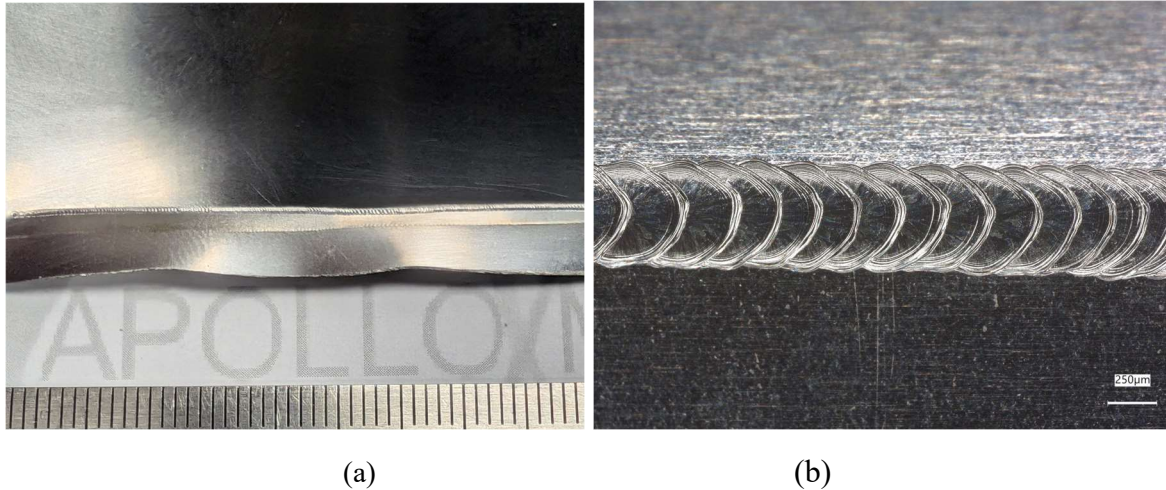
Autogenous weld produced using pulsed HLBW to join 0.13 mm (0.005") thick sheets of 304L SS (a) photograph and (b) stereo micrograph to show detail of weld bead [courtesy of Apollo Machine, Canada].
